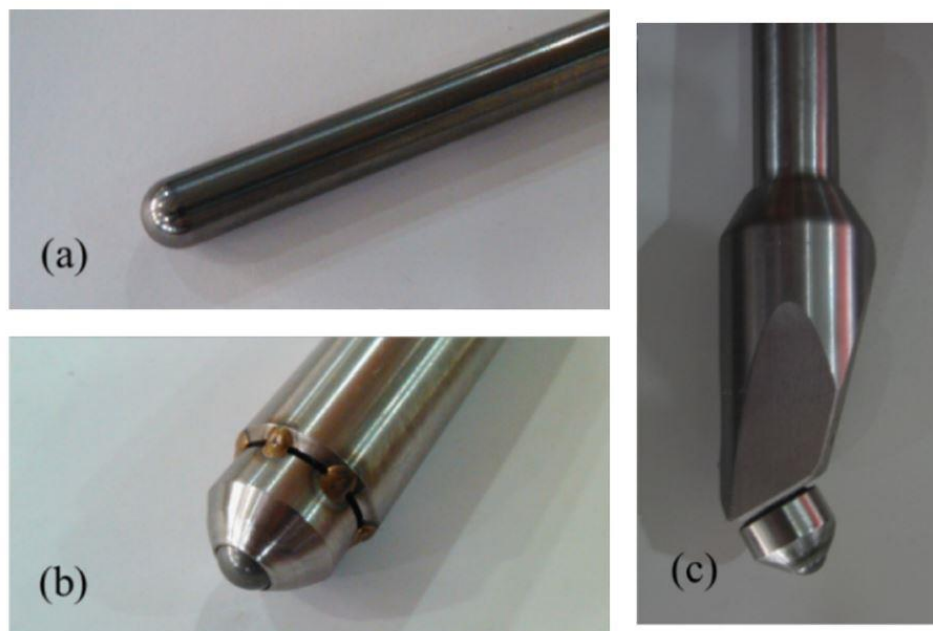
Various types of tools. (a) Rigid tool, (b) VRB tool, and (c) ORB tool [16].
